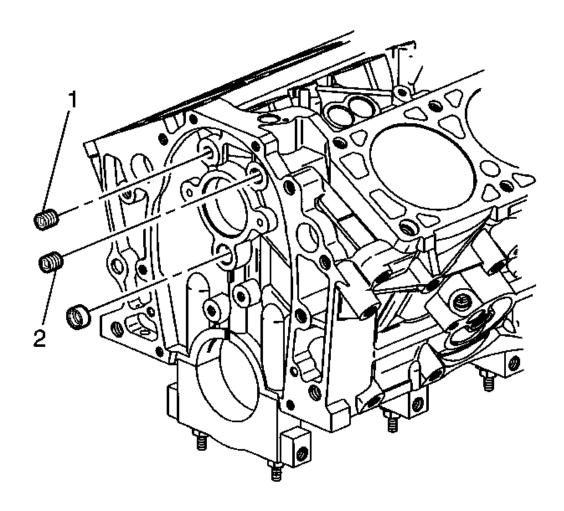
Installing Front Oil Gallery Plugs Courtesy of GENERAL MOTORS CORP.
